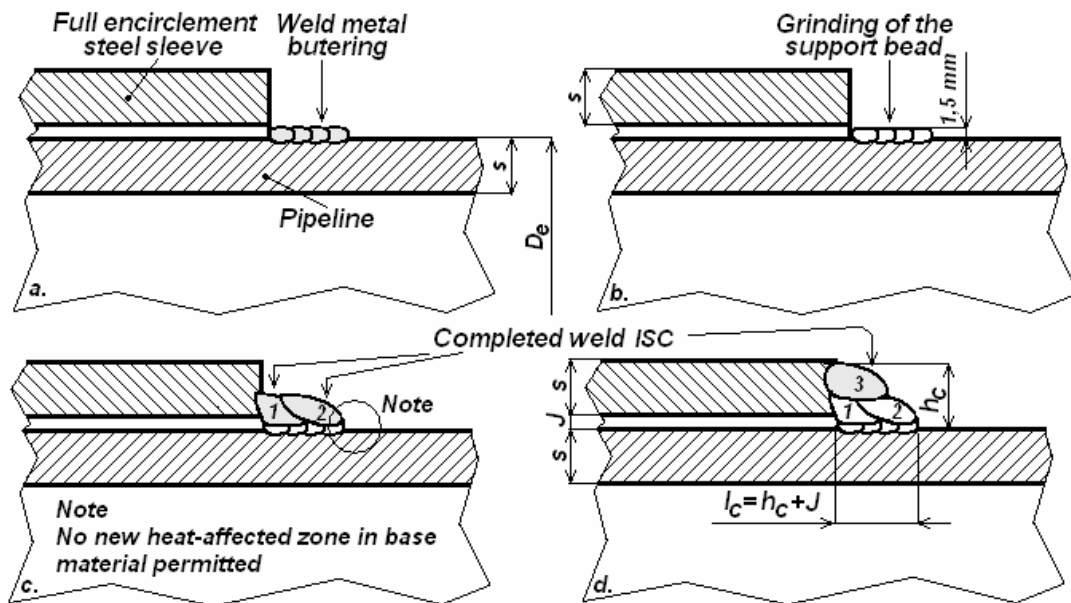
Technology for carrying out the girth welded joints while repairing the pipelines with sleeves
